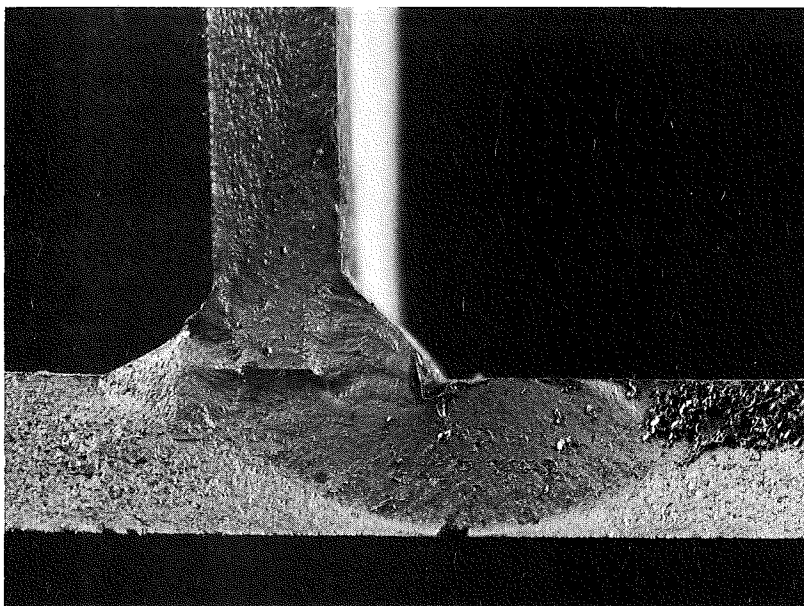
Local undercut in the flange at the location of the continuous weld passing over a tack weld (x2.2)
